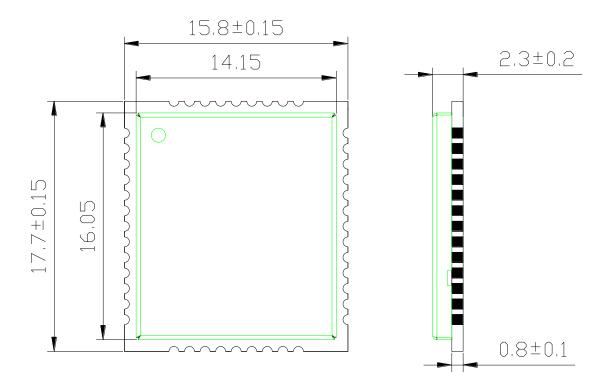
M66 R2.0 Module Top and Side Dimensions (Unit: mm)
